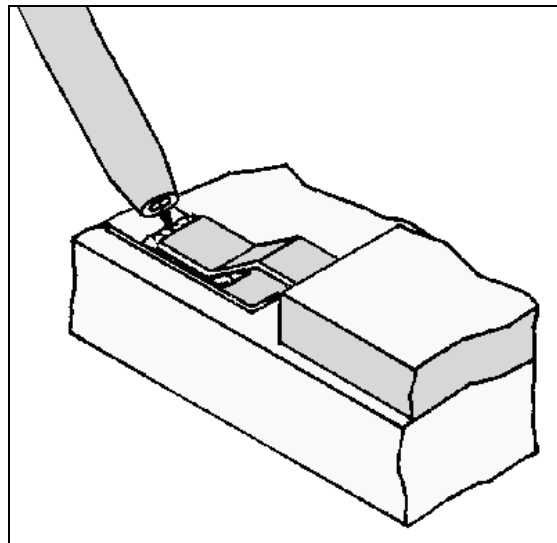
C.—Motorized vacuum/pressure solder removal. HOT AIR JET MODE.
